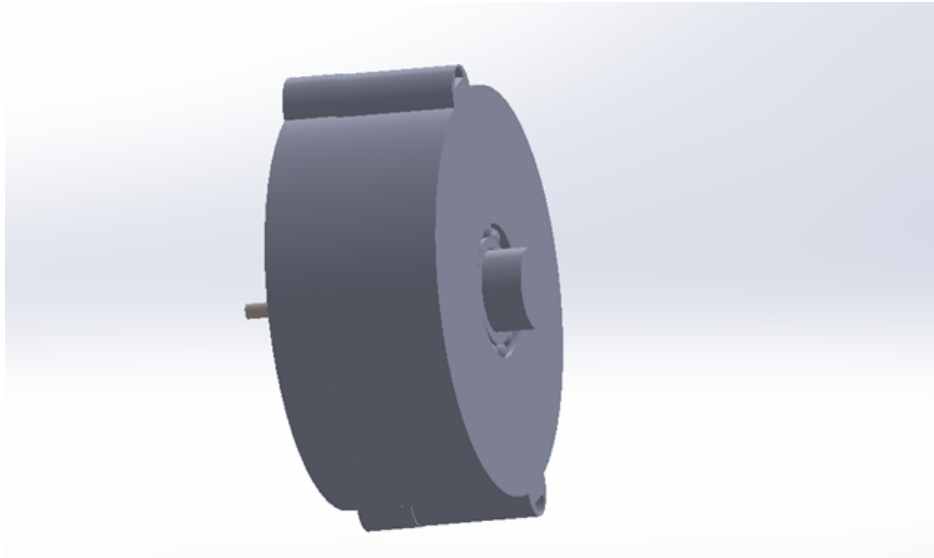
Enclosed housing made of lightweight aluminum for protection against dust and debris.
